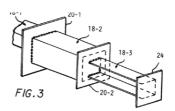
the adjacent ends of sections are welded to the intermediate plates (Mani 2011)
